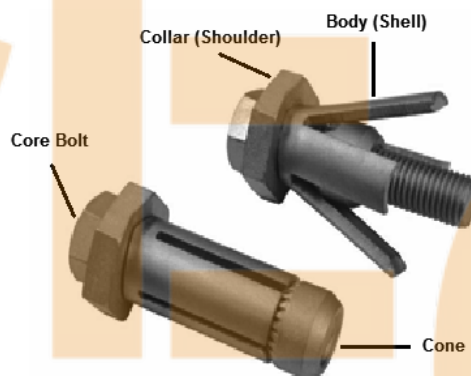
TYPICAL BOX BOLT® TYPE C BLIND FASTENER
